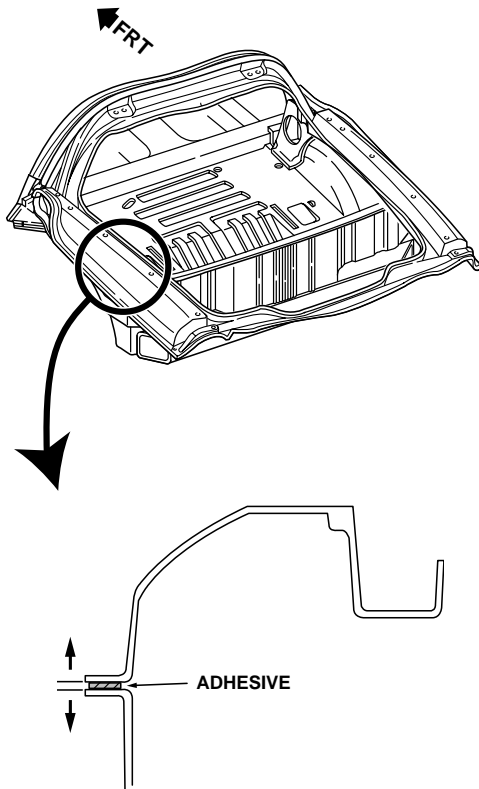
Adjust Rear Surround Using Adhesive Bead 1mm ≤ 7mm In Thickness
